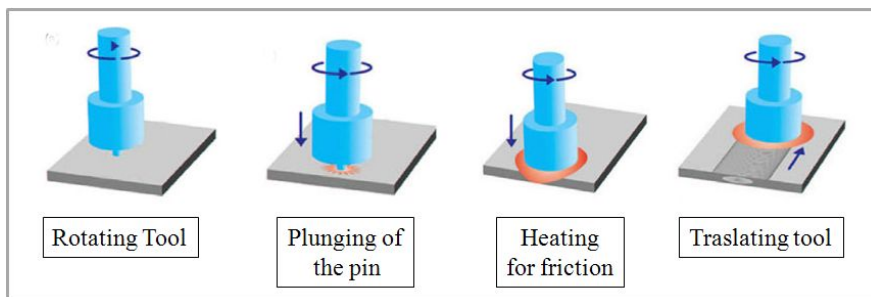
Schematic of Friction Stir Welding
